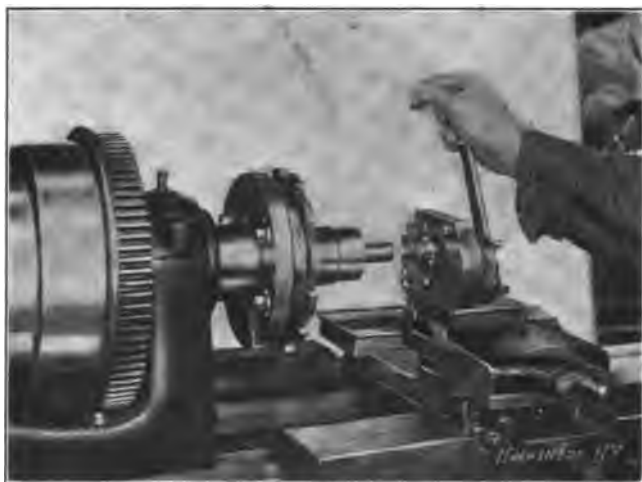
Threading the Gear Case Covers with a Rivett-Dock Threading Tool
